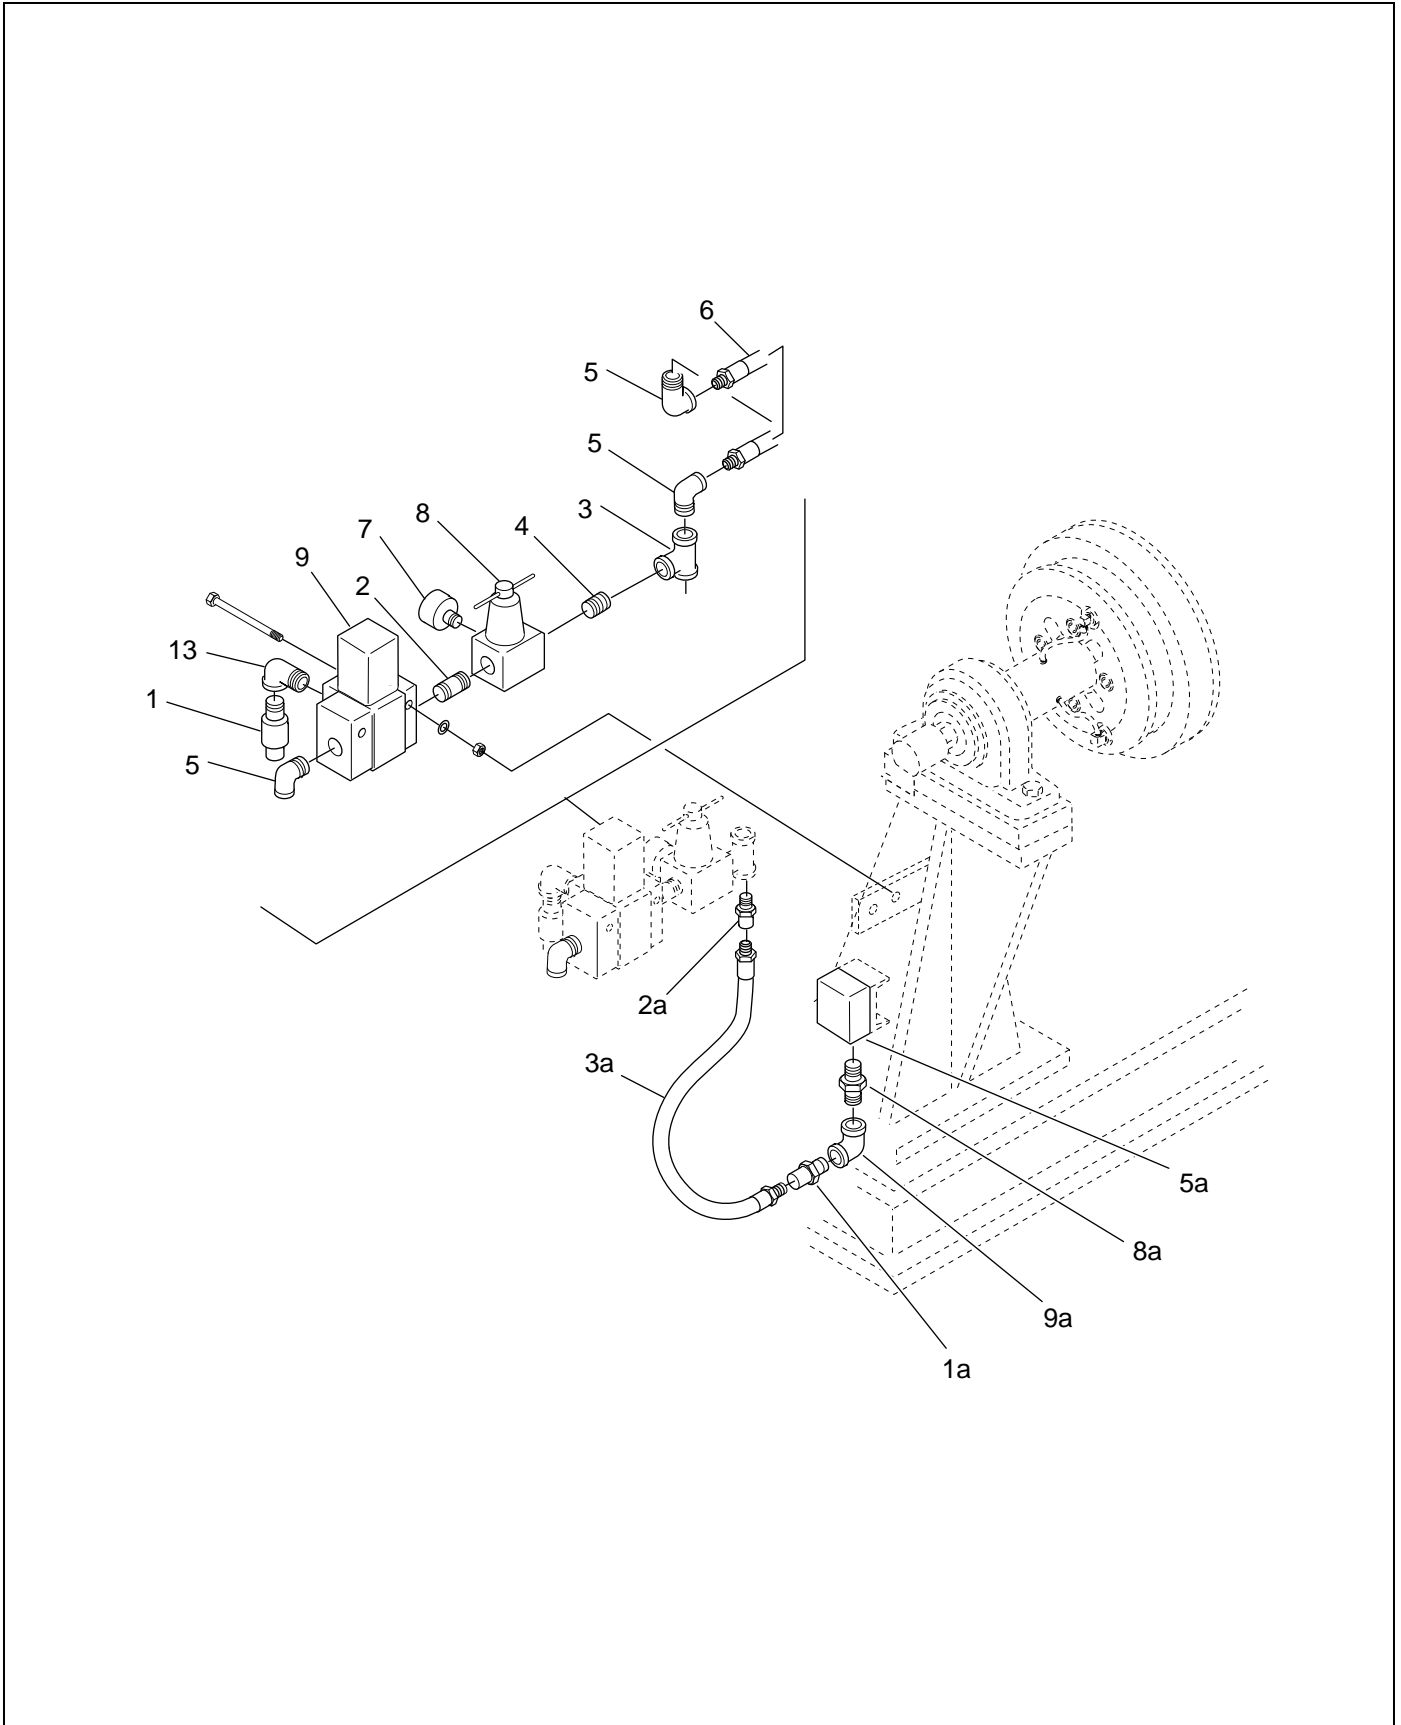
Valve Assembly – Solenoid and Pressure Switch – Clutch (#467494, #467495 and #383834)
